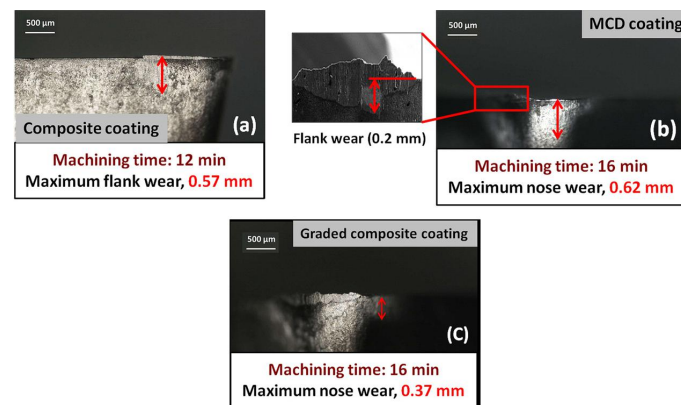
(a) Flank wear image of the dual-layer composite diamond coated cutting tool. Nose wear images of the (b) mono-layer MCD coated and (c) dual-layer graded composite diamond coated cutting tools.
